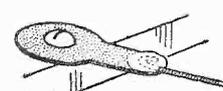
An alternative method of connecting a wire to a soldering tag.
